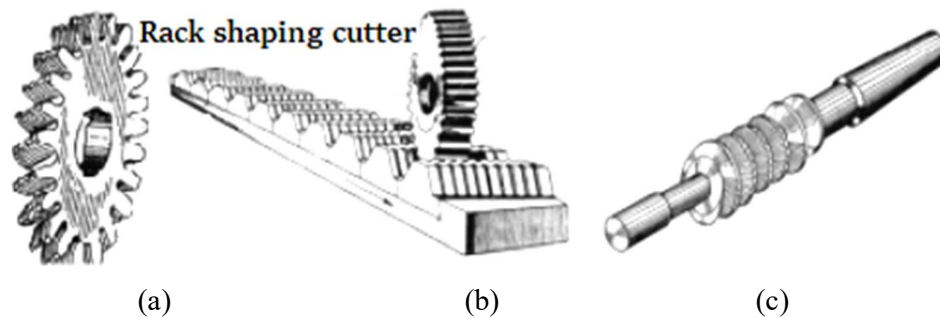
Gear shaving cutters (a) spur gear type (b) rack and (c) worm type [6]
